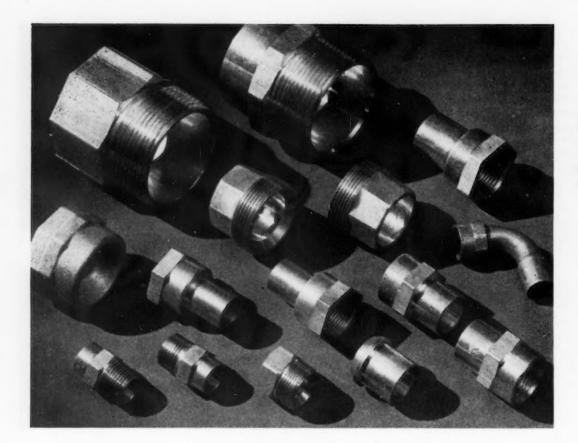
Screw machine products and machined forgings made from 99.5 per cent copper, 0.5 per cent tellurium alloy.
